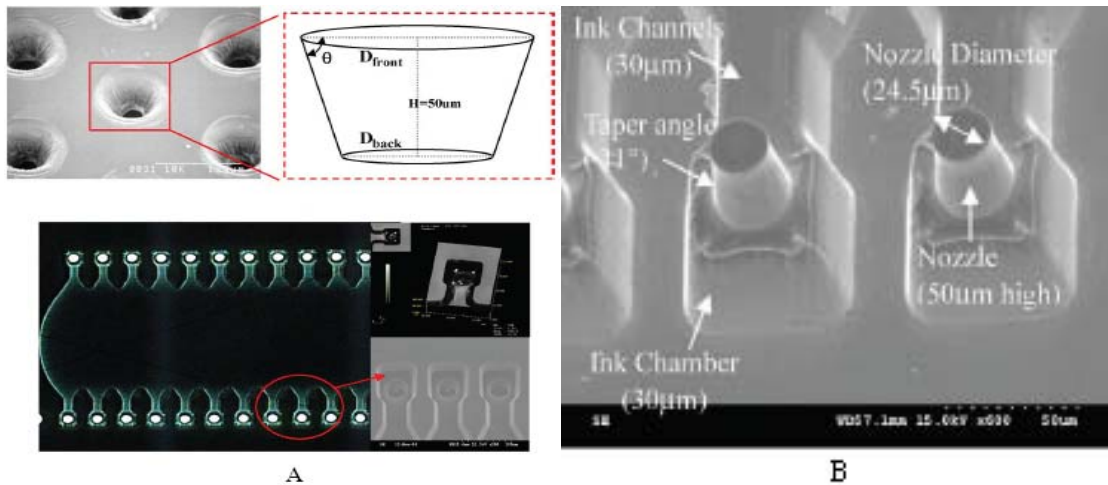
The picture of a 3-D structure A) nozzle plate and B) mold insert for a 1200 dpi inkjet printhead[13]
